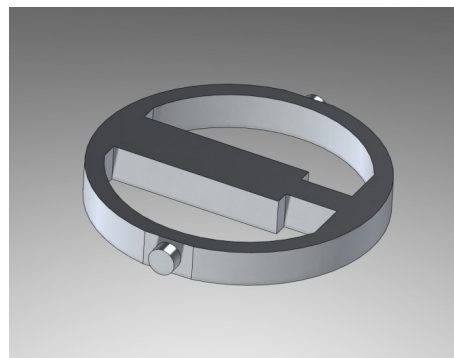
SolidWorks™ image of the force apparatus for the final headgear device. Secured to the head by head straps.
